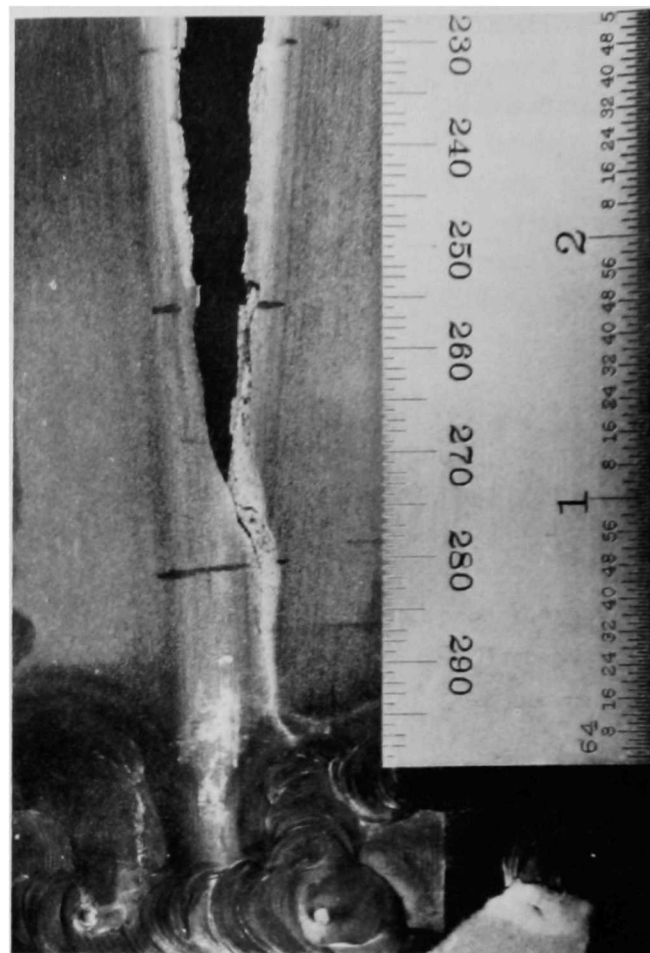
Detail of Lower Crack Tip for 50%-coldworked Hexcan Internally Pressurized to Failure. Neg. No. MSD-61133.
